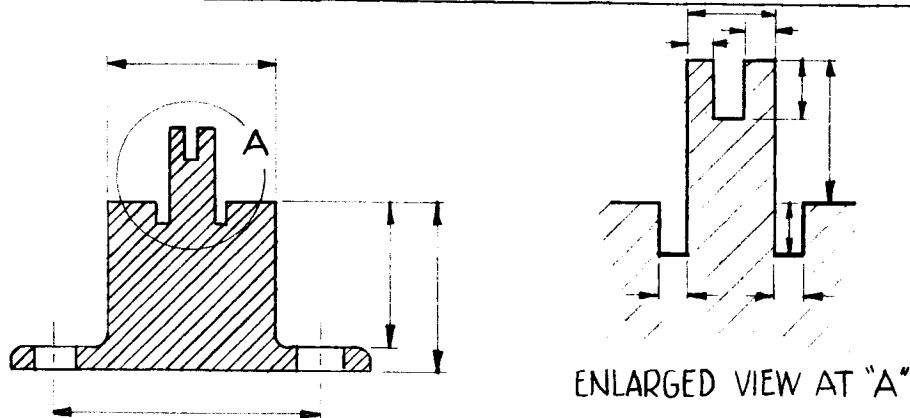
USE OF ENLARGED DETAIL TO CLARIFY DIMENSIONS
